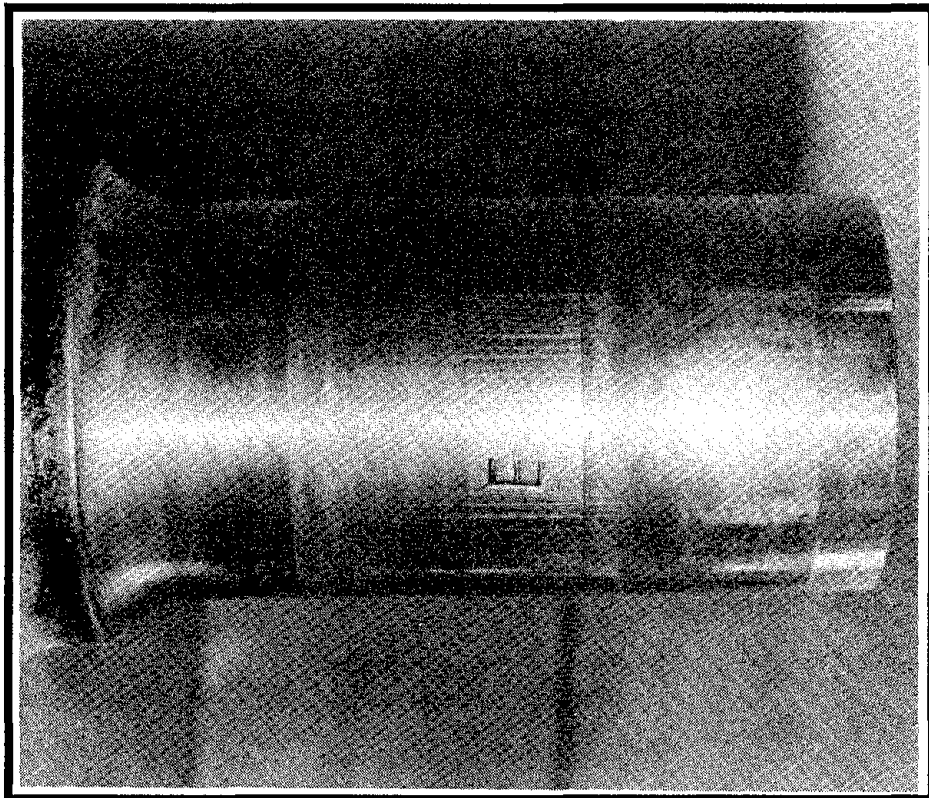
RBFM II Post Test Axle Journal Condition -- Bearing D
